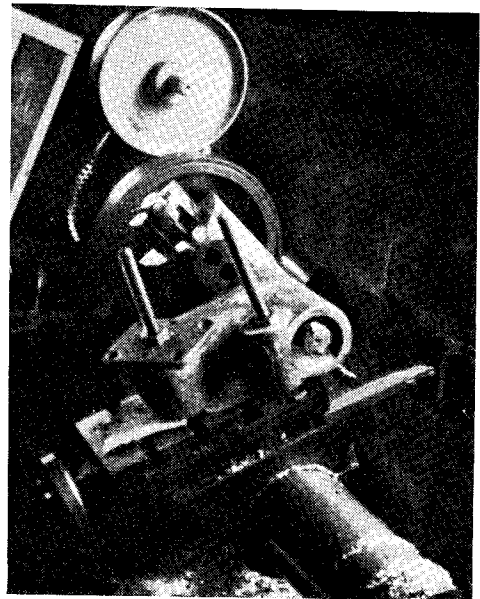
Another boring job: $1\frac{1}{8}$ in. diameter hole $3\frac{1}{4}$ in. long in gunmetal
